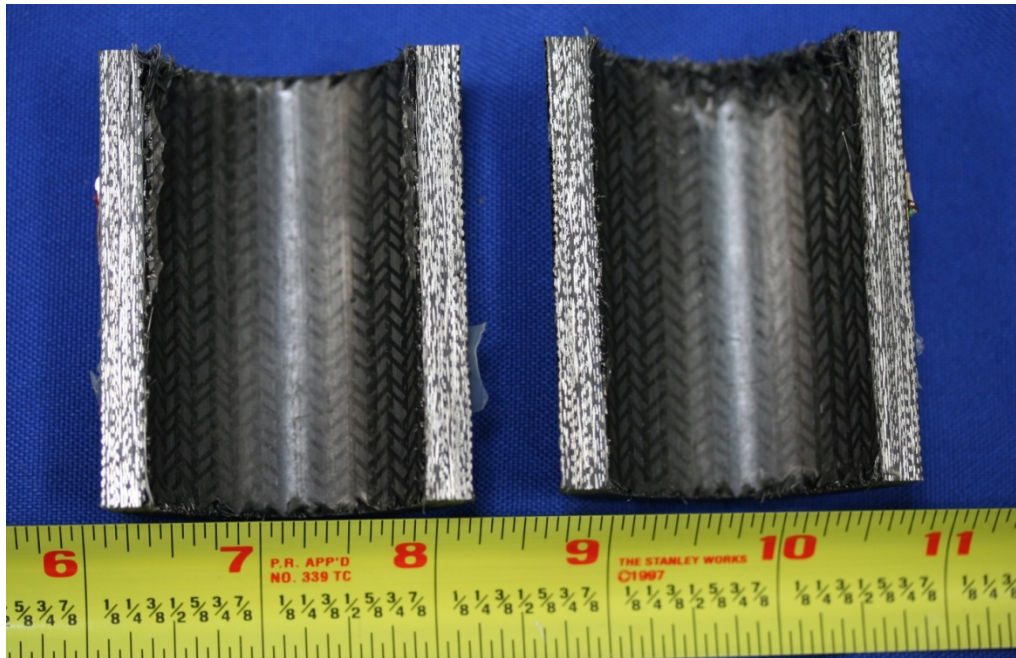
Photograph of sectioned 2.0-inch-diameter specimen OCT12-1.
